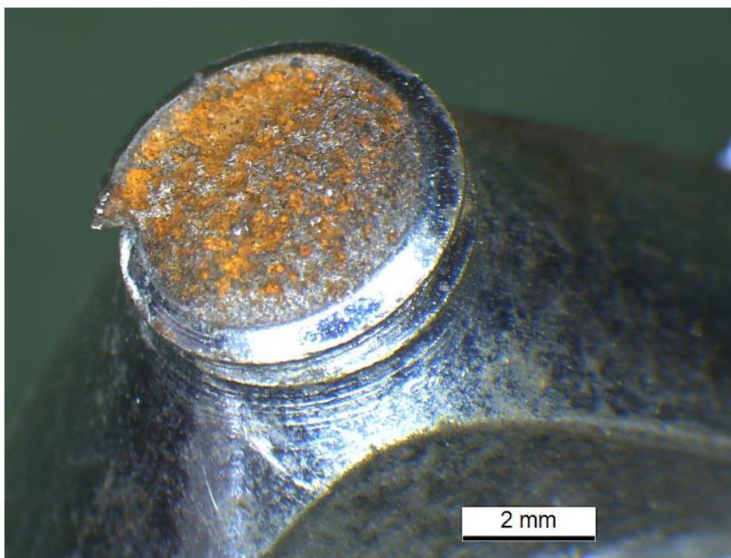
Aft right hand steering rod fracture surface with signs of surface corrosion.
